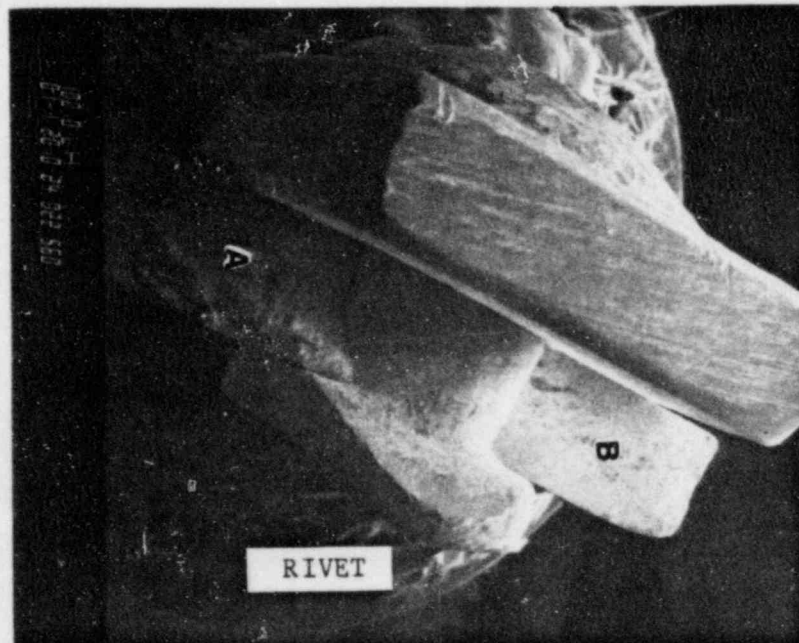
SEM Fractograph of the In Situ Fractures in Spring Sample DB-6 Showing Rivet, Pin Assembly, and Fracture Surface
